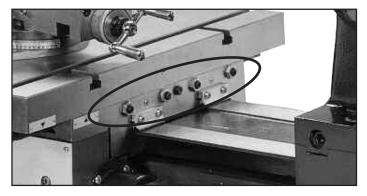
Gib Adjustment Screws - Cross-Slide Table
